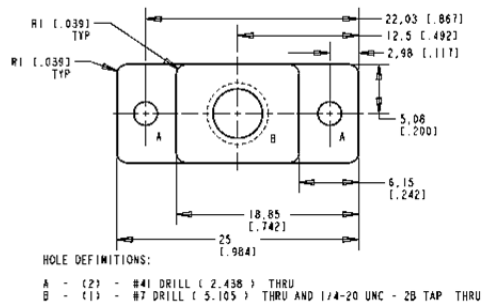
Basic Mechanical Dimensions of Tripod Mount Adapter (dimensions in mm [in])
